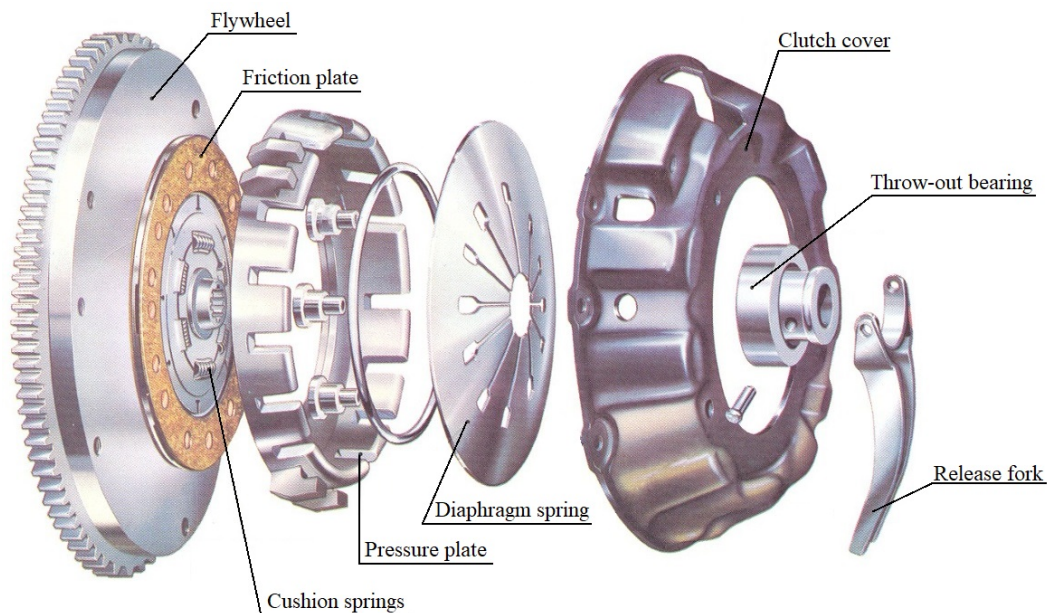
Exploded view of a diaphragm dry clutch system, figure adapted from [5]
